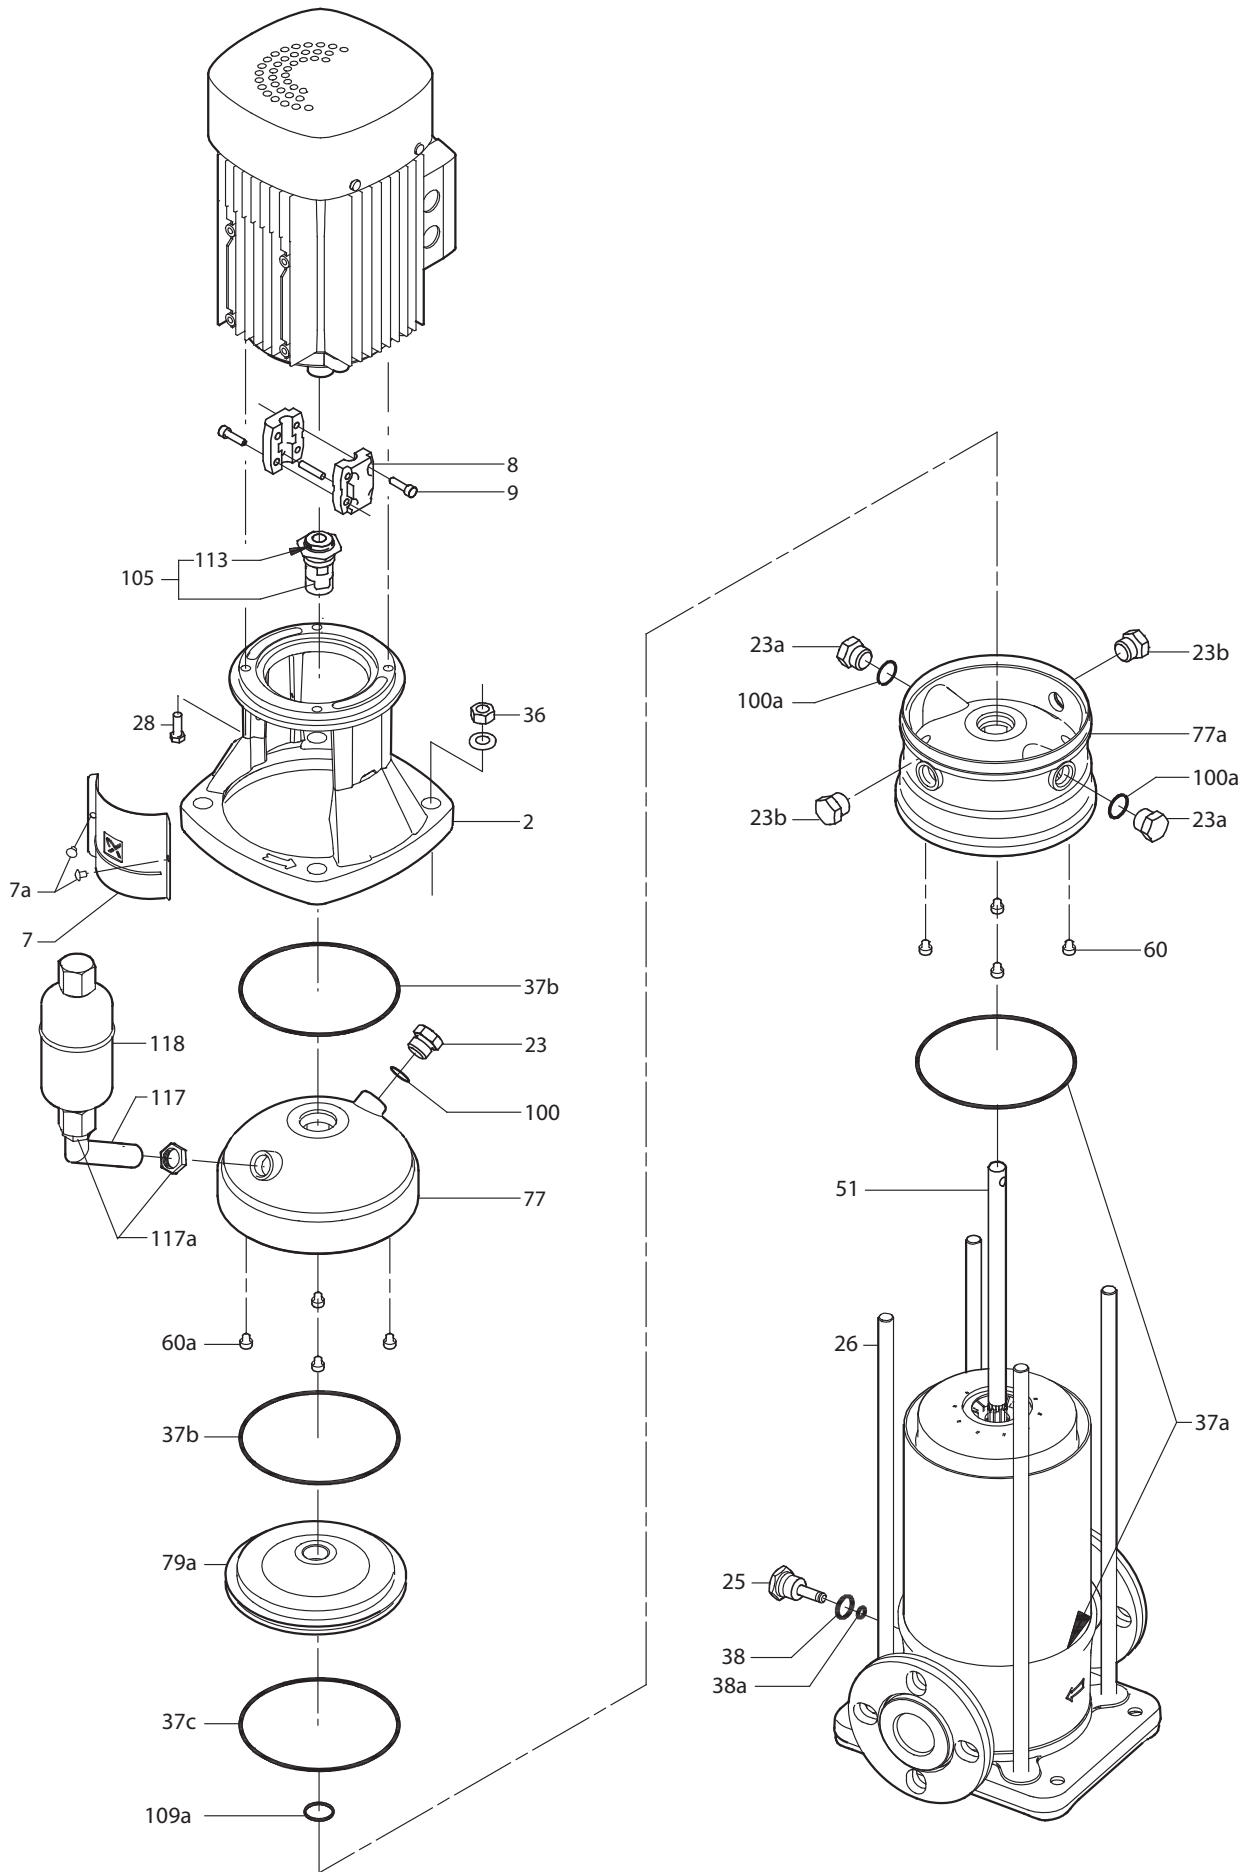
Exploded view, CRI, CRN 10, 15, 20
